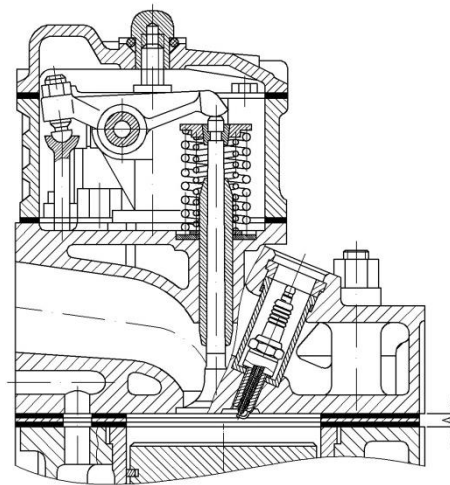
Scheme of the combustion chamber of a gas engine converted from a D-243 diesel engine
